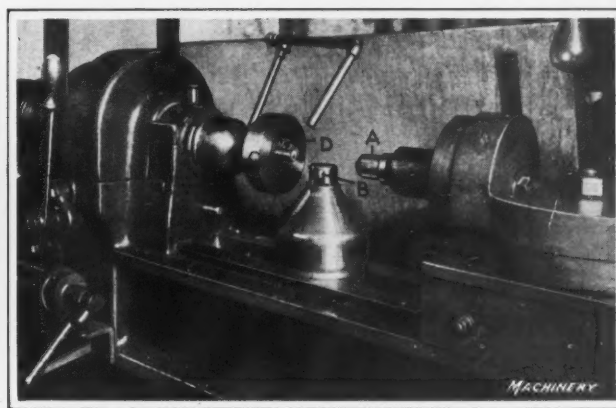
Lathe equipped with Special Mandrel and Pilot Facing Head for finishing the End of the Neck Concentric with the Interior of the Shell
